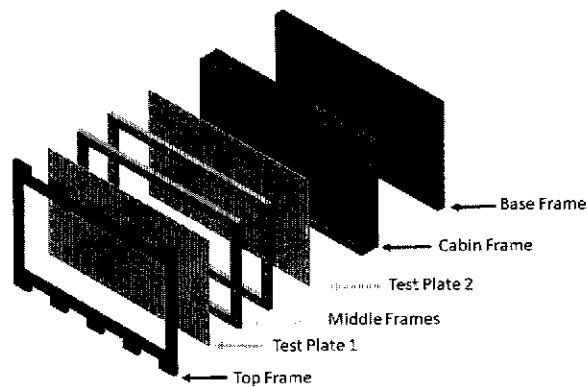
EXPLODED (STRUCTURAL ONLY) VIEW OF PAYLOAD DESIGN WITH EACH COMPONENT LABELED.
